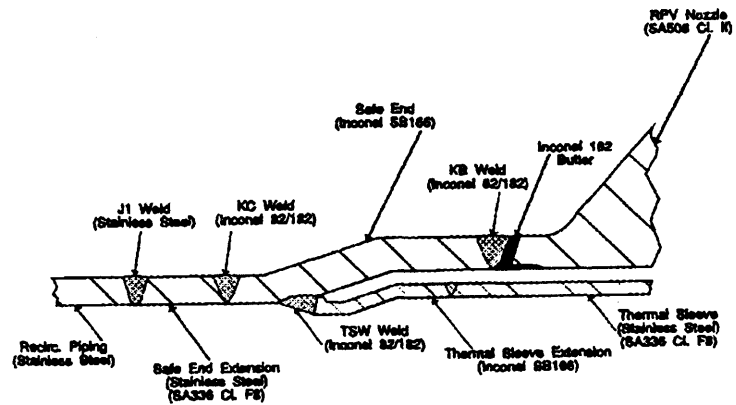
N2 Nozzle and Safe-end Weldments
